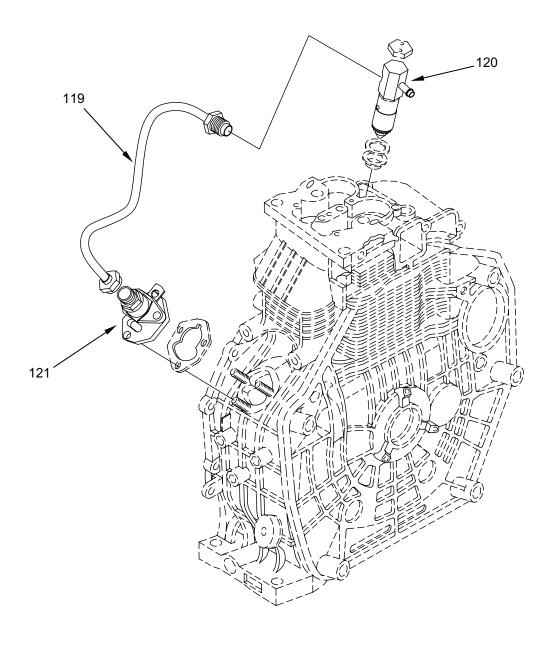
Engine, Diesel (Sheet 6 of 9) (Fuel Injection Pump).
